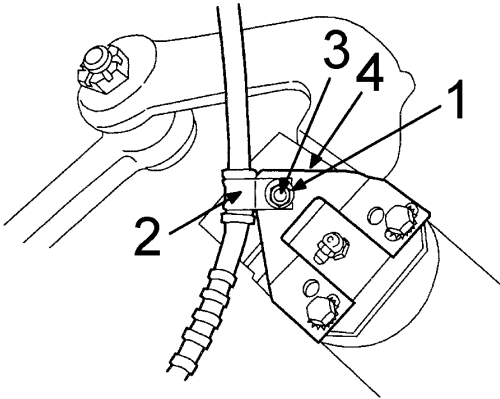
Install Brake Line Retaining Clip and Install Hex Nut and Flat Washer
